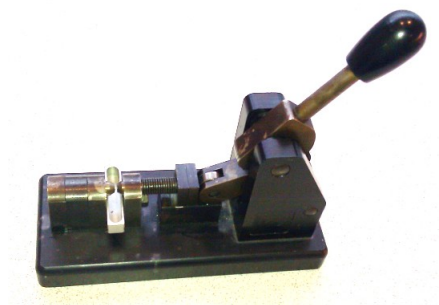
The mechanical punch used to cut the 3 mm specimens.
